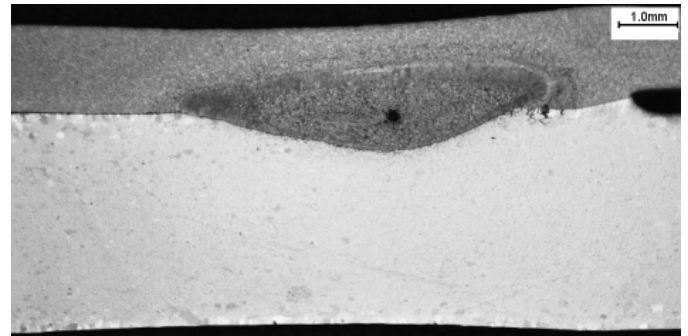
General view of the weld joint with visible cracks and porosity in the welding nugget, etched with Ma1Al
